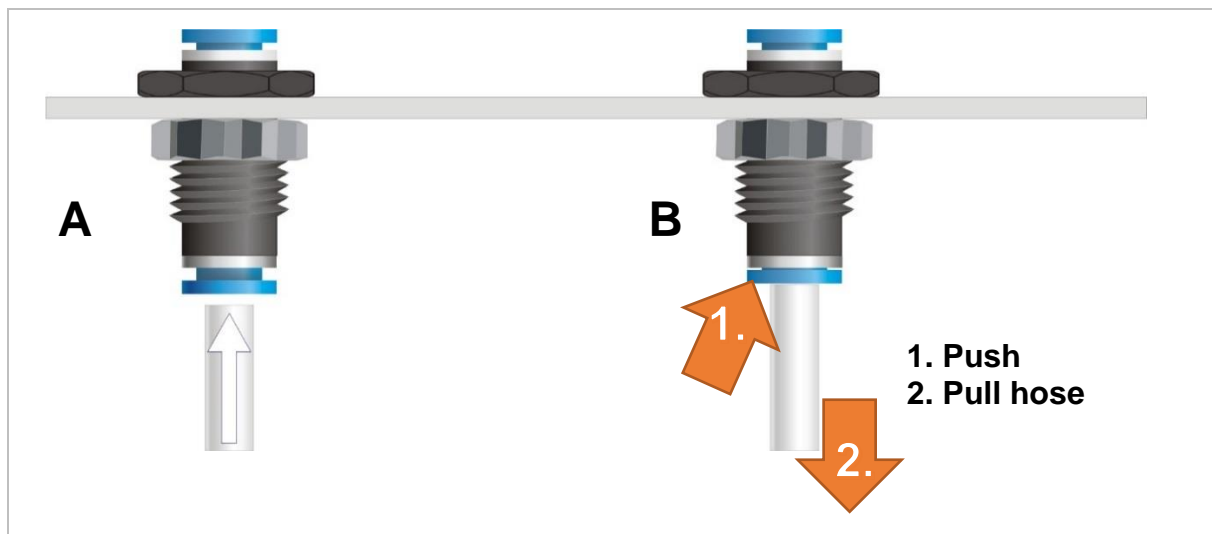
Mounting hose onto push-in bulkhead fitting
